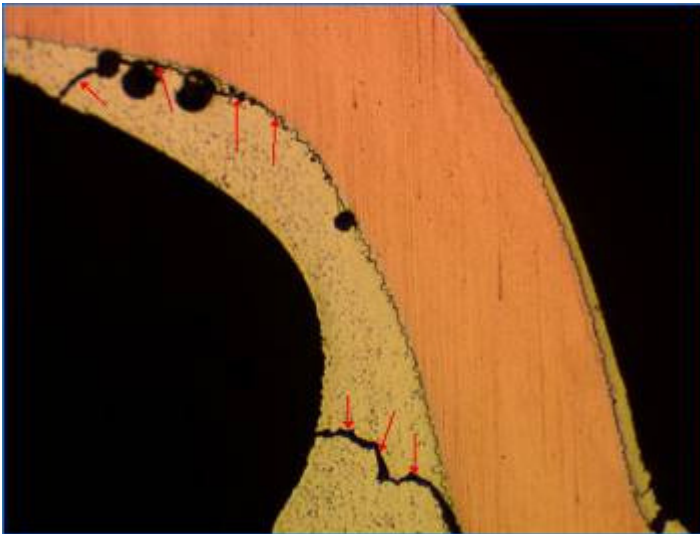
cross section, SN63, U20, right lead and solder crack and voids, 200xb
